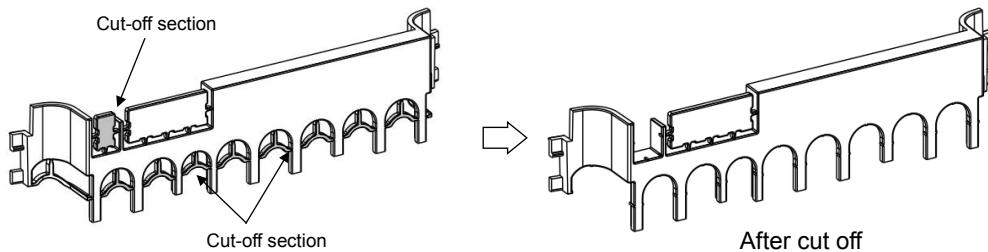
Wiring Guide (FRN0069E2■-2□)
